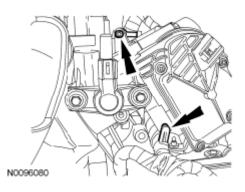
Locating Wiring Harness Retainers Of Intake Manifold
